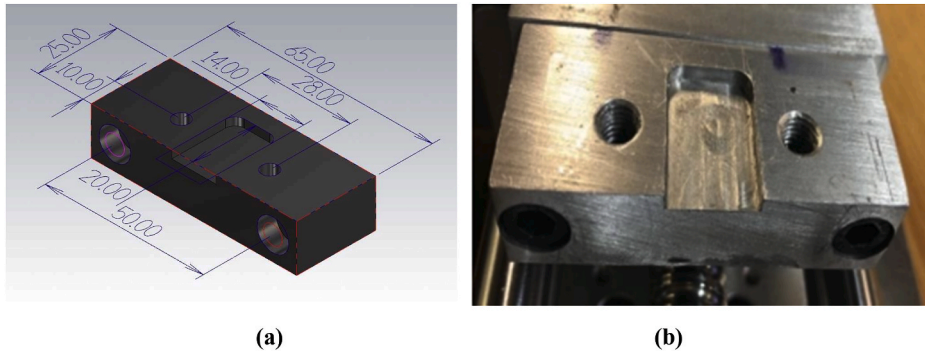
(b). (a) Female part of tensile fixture (unit: mm), (b) Actual specimen holder.
